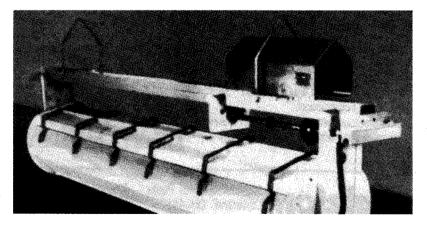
Special-length barrel assembly for plating elongated parts or for use in a rack plating line.
